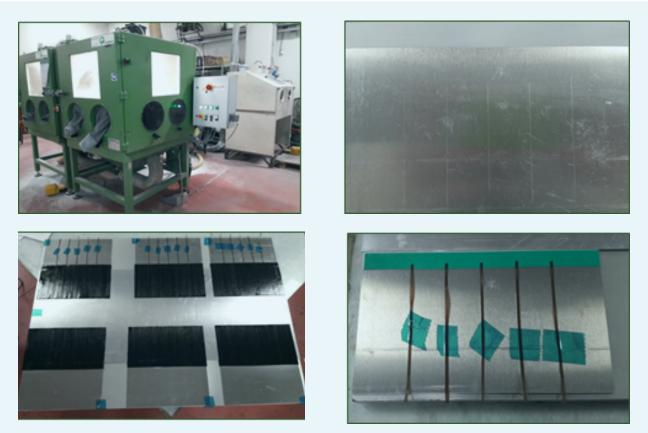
Preparation steps for the lap-shear specimens used in the test campaign
